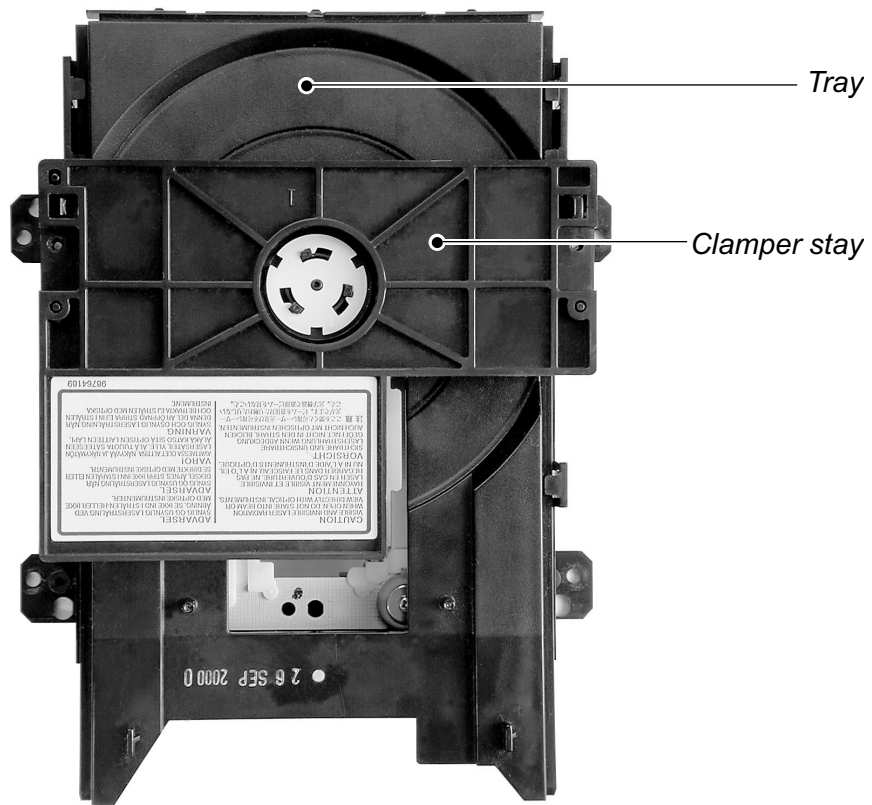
Mechanism chassis assembly (Top side)
